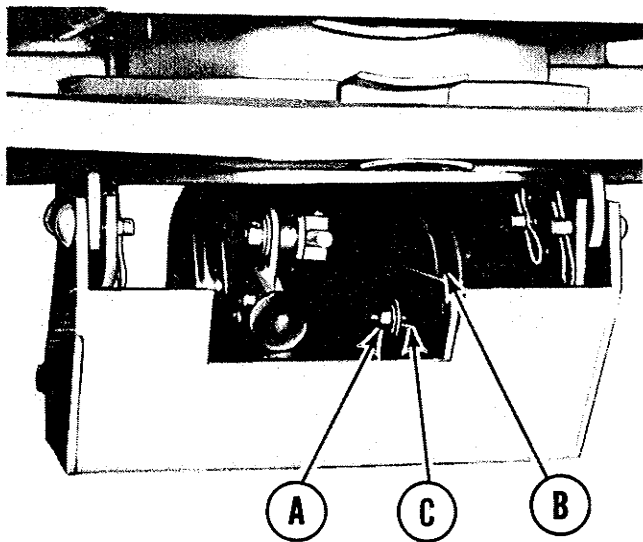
Idler pulley adjustment used to center mower drive belt between tractor frame and battery.
